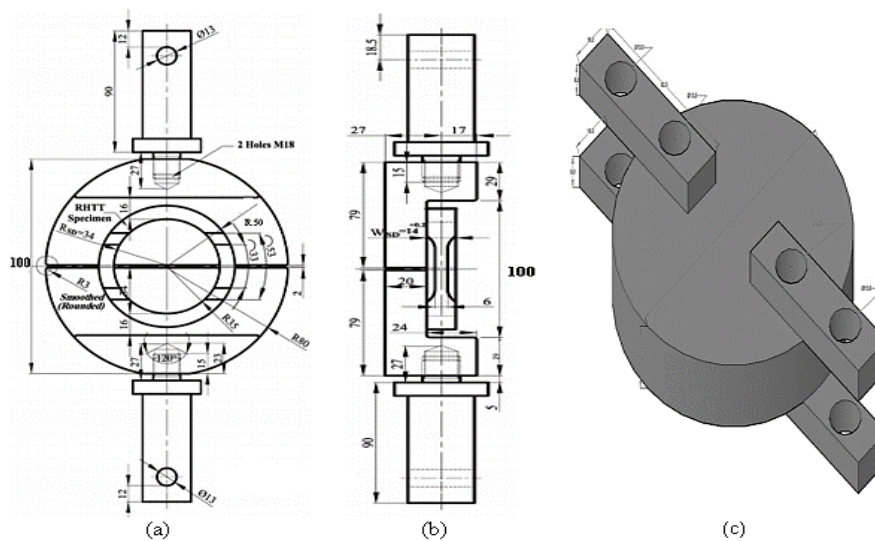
Design of the test rig with geometry: (a) Front view, (b) Side view, (c) Designed test rig view.
